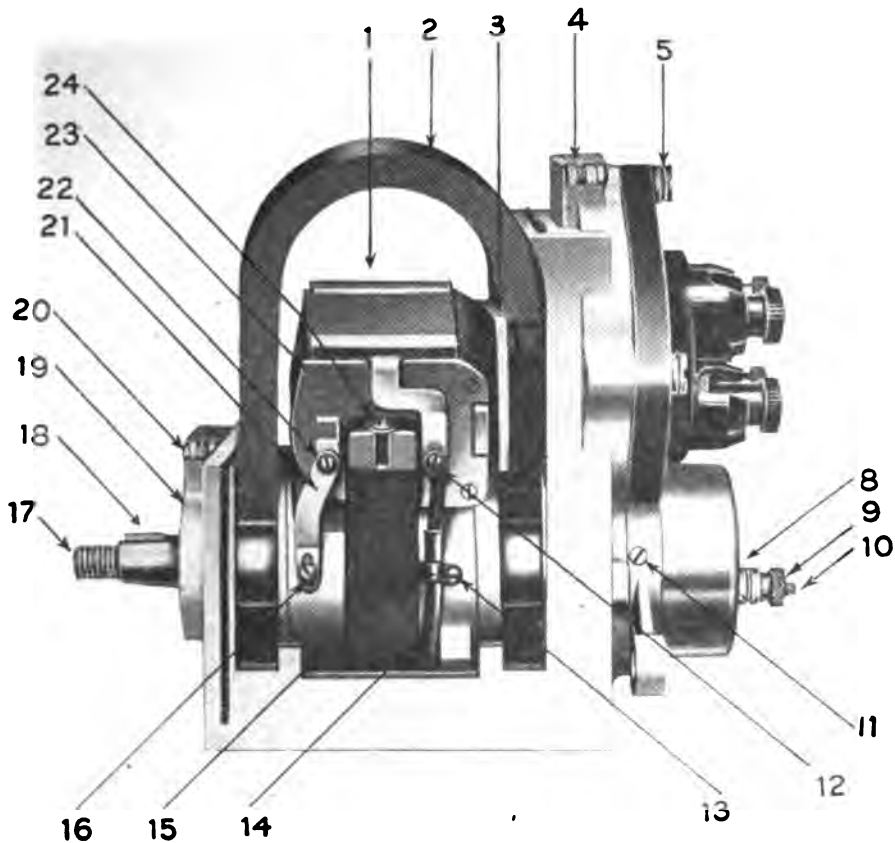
Side view of parts of Dixie Magneto (4 cylinder).
